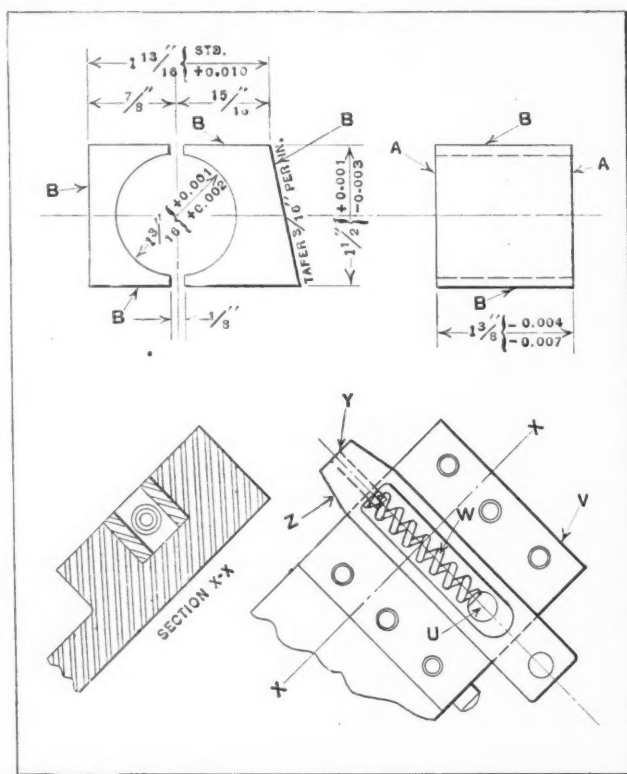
Details of Box for Cross-head Pin, and Section of Indexing Fixture
